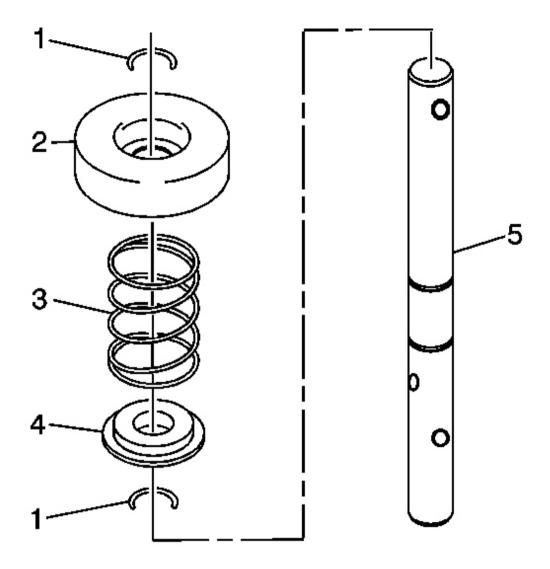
Exploded View Of Shift Rod Assembly Courtesy of GENERAL MOTORS CORP.
